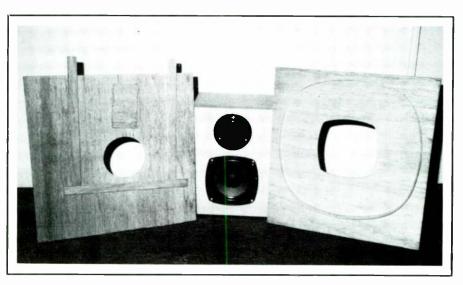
Woofer jig (r) shows groove with embedded Plexiglas, while tweeter jig (l) shows locating strips.
